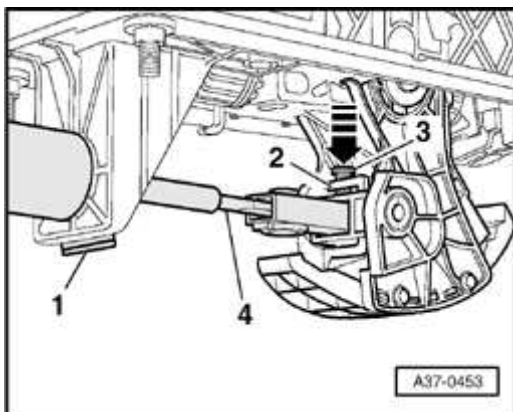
Inserting End Of Selector Lever Cable Into Joint Of Selector Lever
